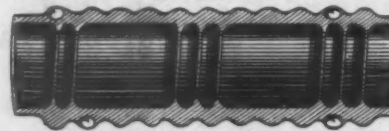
Method of Threading Inside of Shield to Fit Any Standard Lag Screw.
